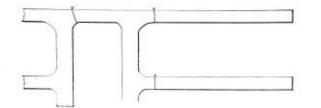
Three Breaks Welded at Same Time on Switch Engine
